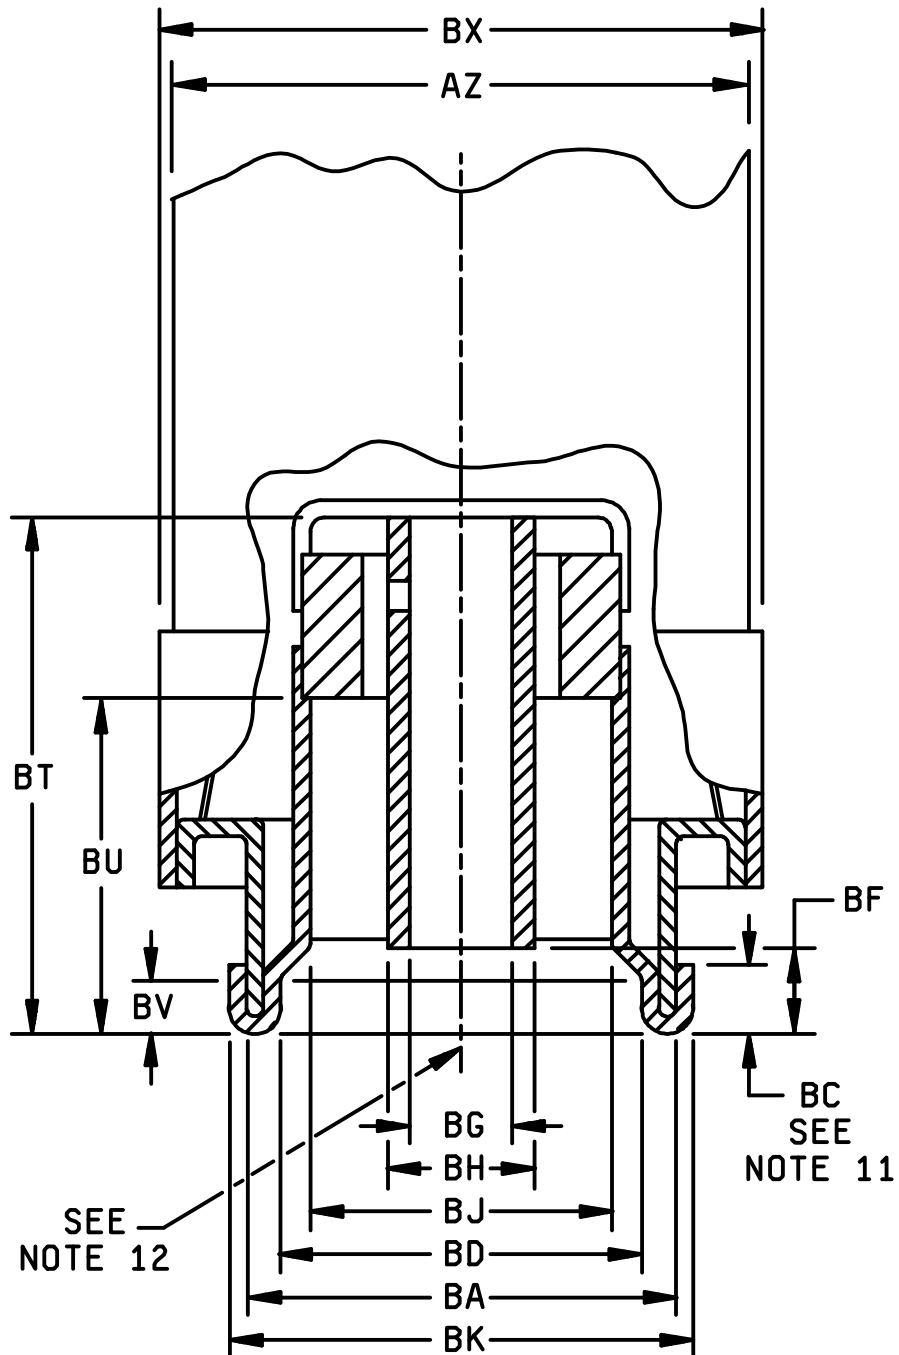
A. Alternate outline drawing of electron tube type DOD-042 (detail enlarged).
